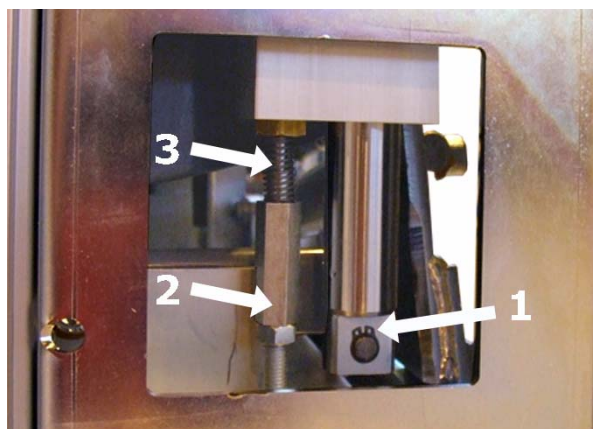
Parts in the bottom of the pump: retaining ring (1), connecting rod (2) and compression spring (3).
